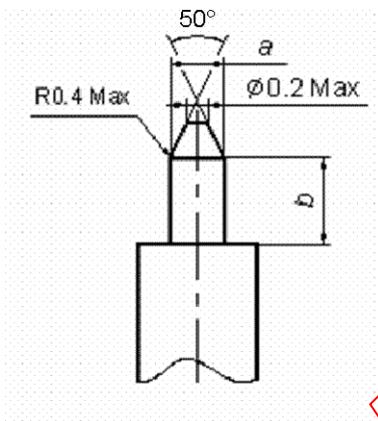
Gauge pins for socket-centre contact (for dimensions see Table 3)
